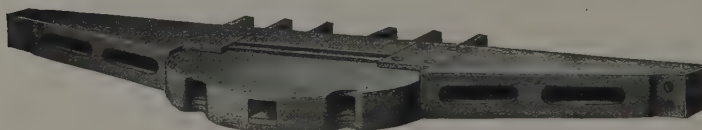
Commonwealth Steel Company's Cast Steel Buffer Sill for Passenger Train Cars.
